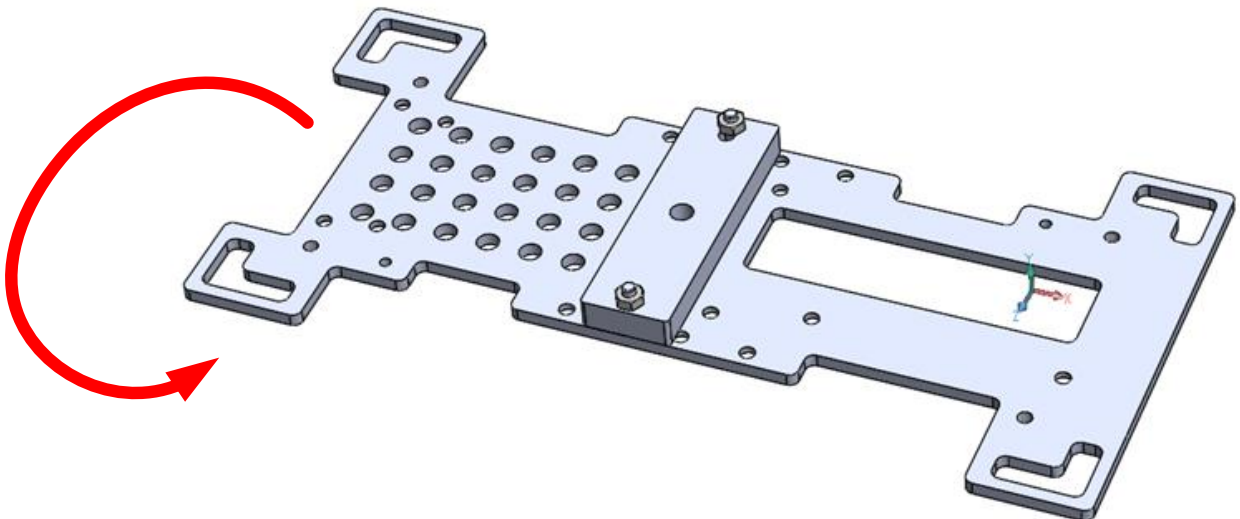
Tripod adapter mount (view from top of mounting plate)
